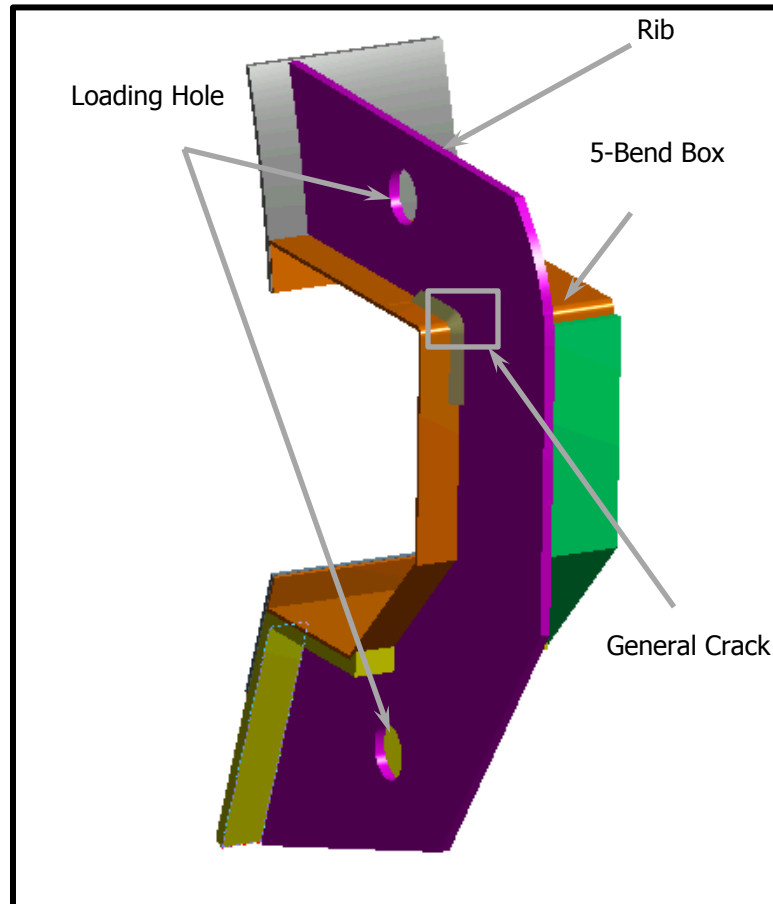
The CAD geometry used to generate the finite element model for the fracture mechanics analysis.
